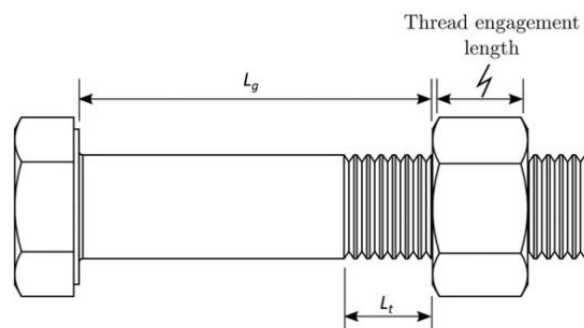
Definition of grip Length L_g , threaded length L_t , and thread engagement length [8]
